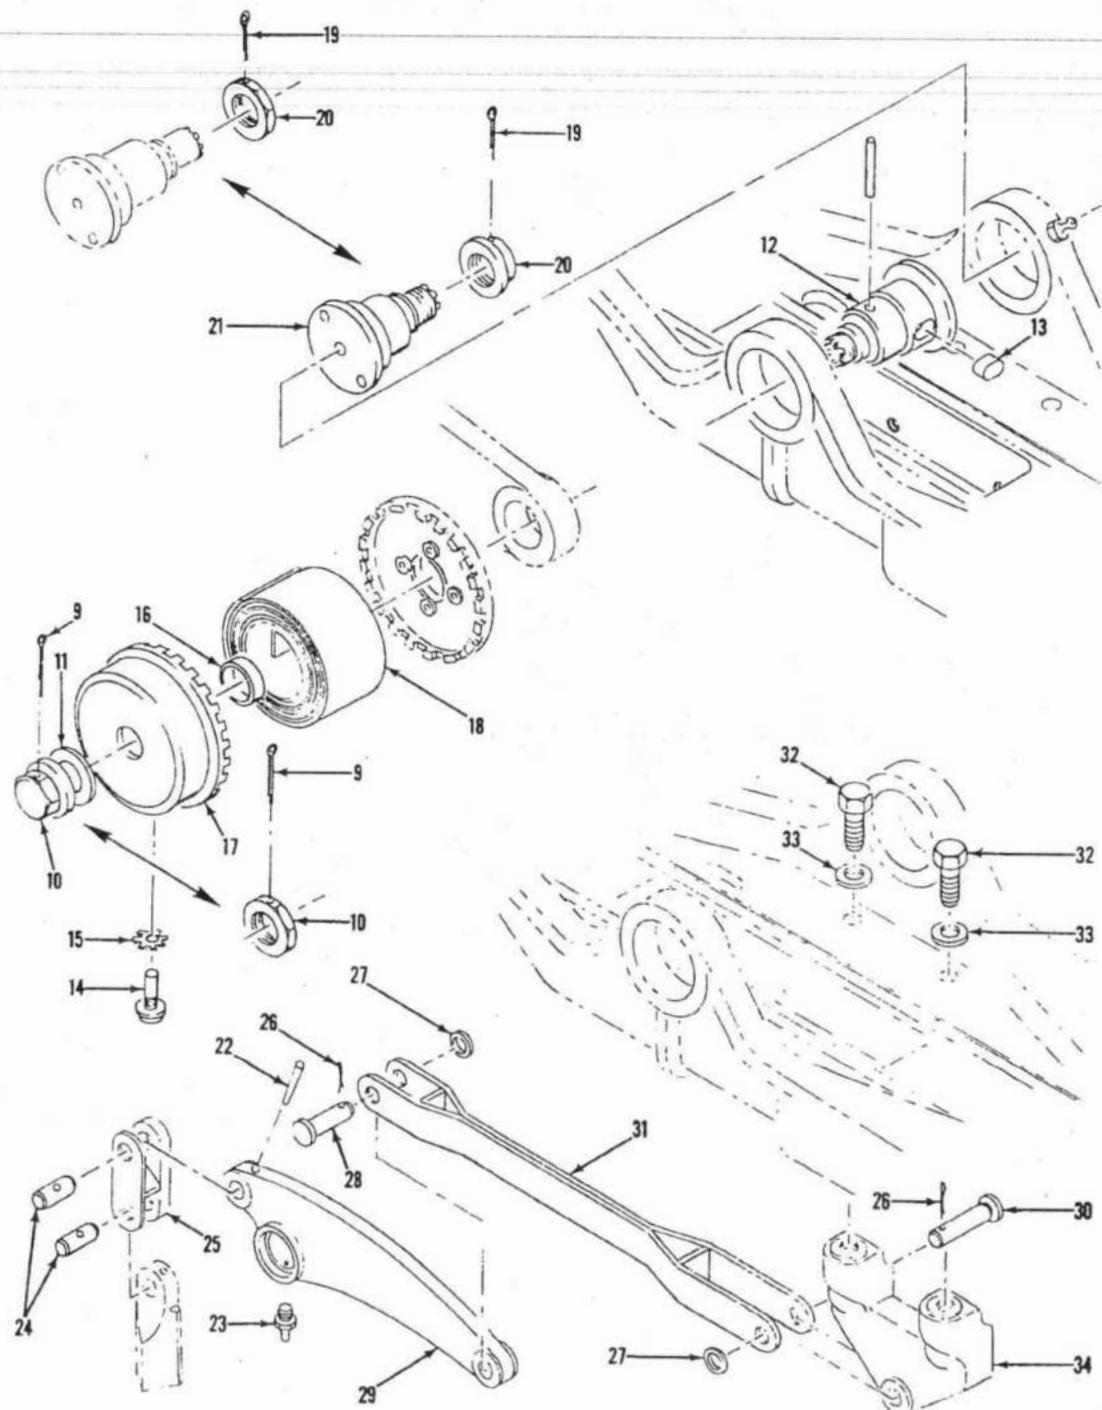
20 MM Cradle (MK 5 MOD 0, 1, 3 and 4) (Sheet 2 of 2)
